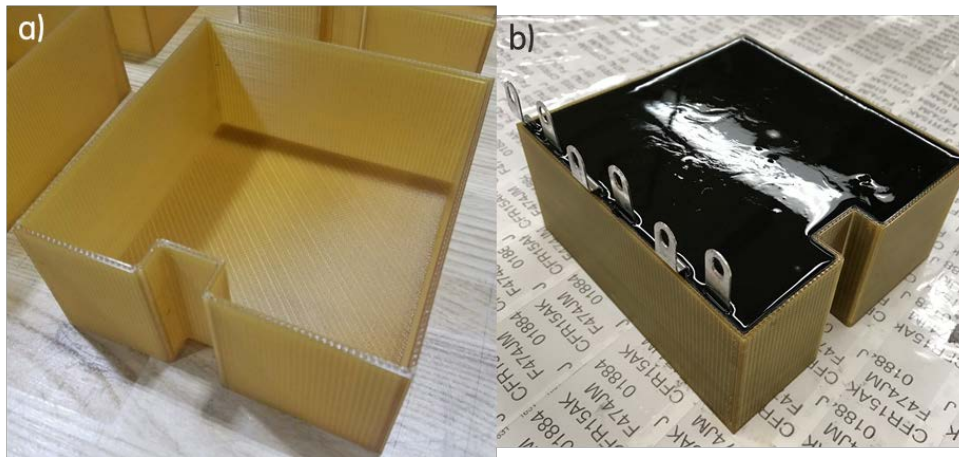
$700 \mu\text{F}$ capacitor module assembly. a) An empty case b) A fully assembled capacitor module ready for shipment.
